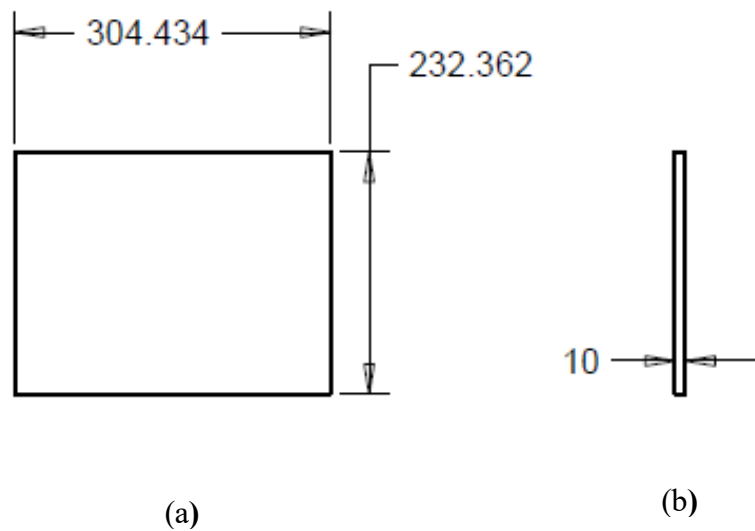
Adjustable Plate(a) Top view and (b) Side view
